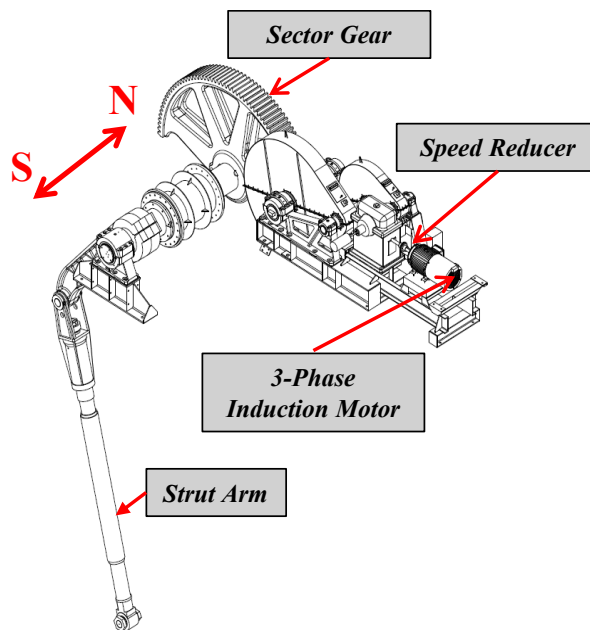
perspective view of the Tainter valve machinery system, including the key components: sector gear, speed reducer, 3-phase induction motor, and strut arm.
